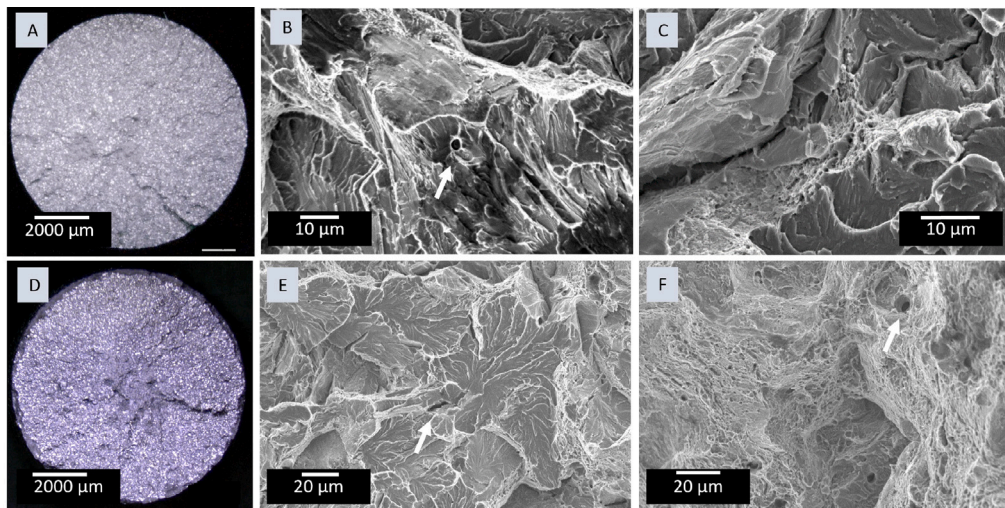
Fractography of R335V (A–C) and R350HT (D–F) tensile specimen. The arrows indicate inclusion sites in areas showing cleavage and ductile fracture.
